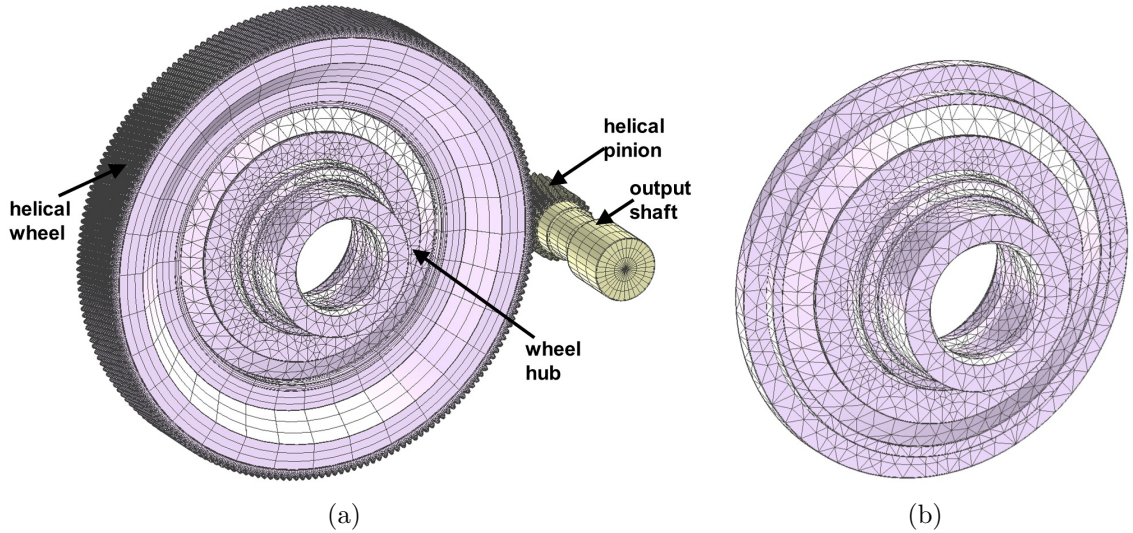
(a) FC5500 helical wheel and pinion, and (b) part of the wheel hub externally meshed in Patran.
